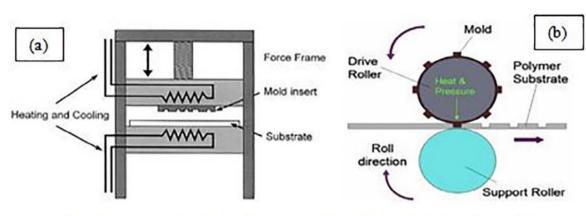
(a) Conventional/Single-stage Hot Embossing [1], (b) Roller to Roller Hot Embossing [2].
